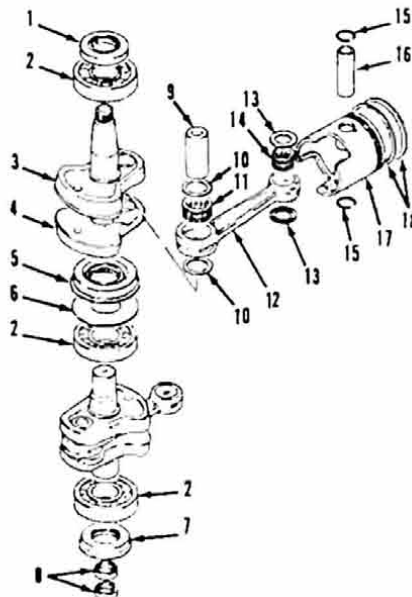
Exploded view of piston and crankshaft assembly.
